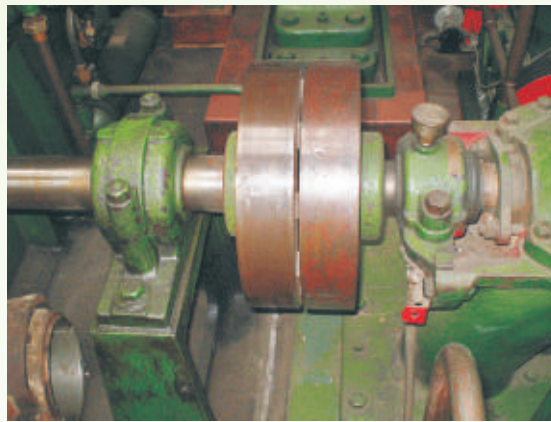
DETAILS OF AN UNPROTECTED FLANGE COUPLING
